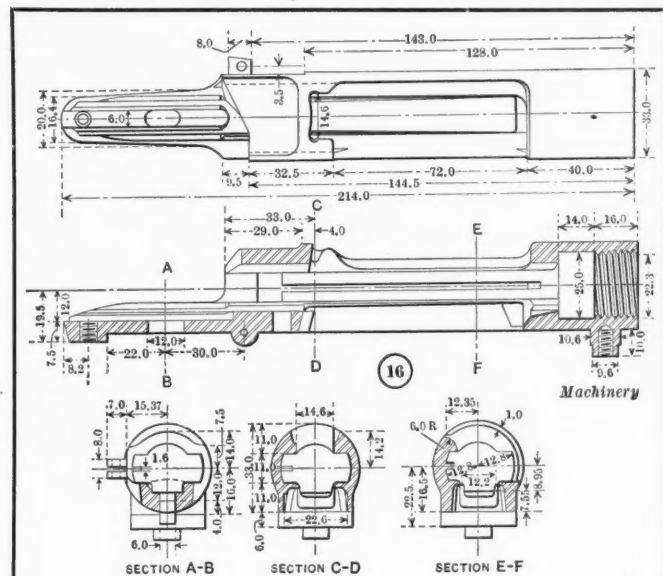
Spanish Mauser Receiver, Retaining Bolt, Trigger and Sear Parts
